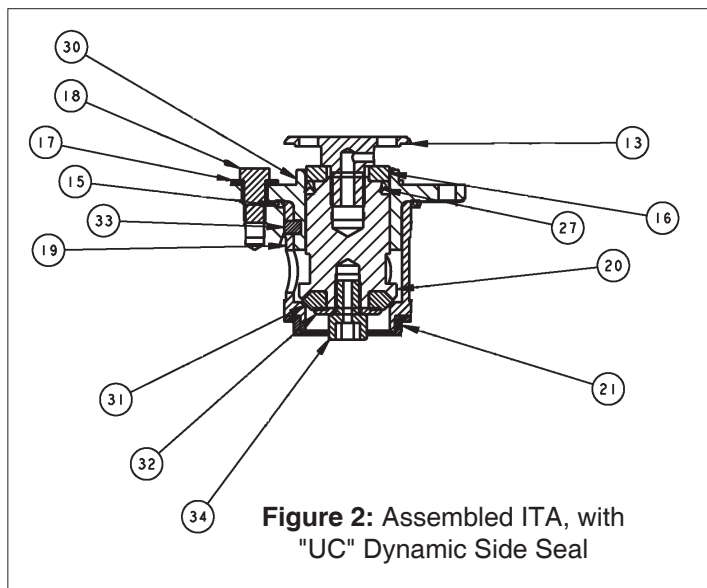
Assembled ITA, with "UC" Dynamic Side Seal
